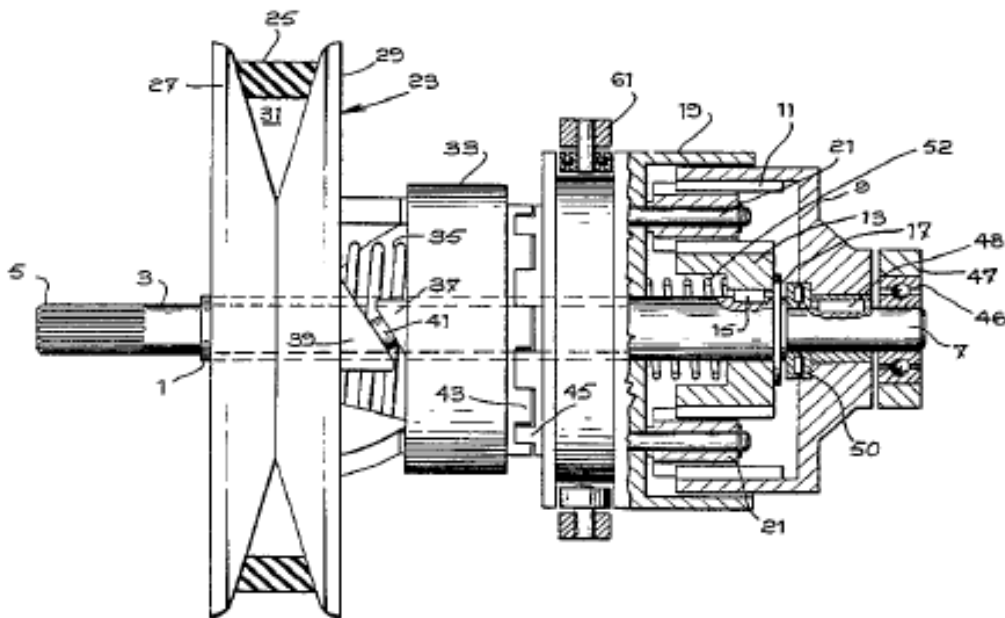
Planetary reduction mechanism of Patent No. 4502353 with locked dual output and external drive flywheel.
